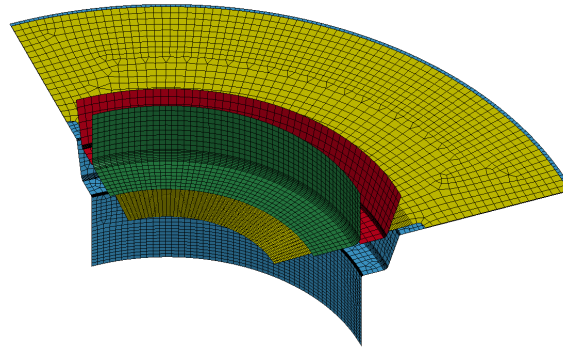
Blank, stamping die, punch1 and punch2. Blankholder is not shown.
